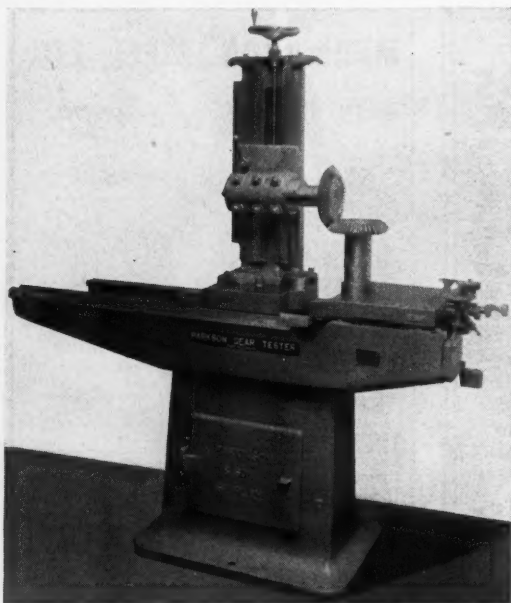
Parkson Gear Tester Set Up For Testing Bevel Gears.
